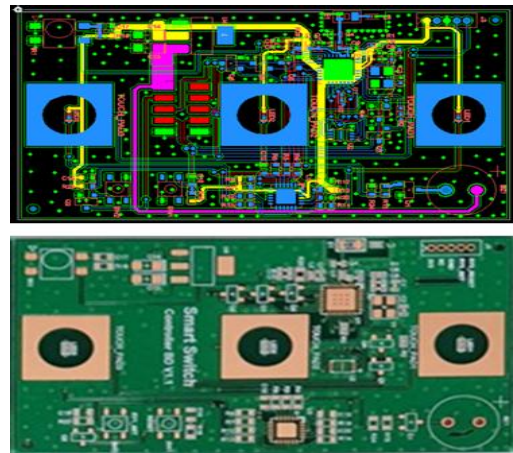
Controller Board(Top:Arwork, Bottom:PCB)
